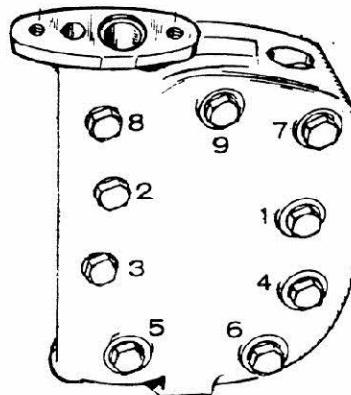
CYLINDER HEAD BOLT TORQUE SEQUENCE
